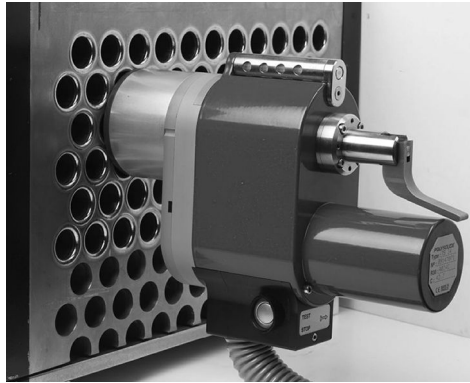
Orbital TIG welding head—welding of recessed tube-to-tubesheet. (Courtesy of Polysoude S.A.S, Nantes, France.)
